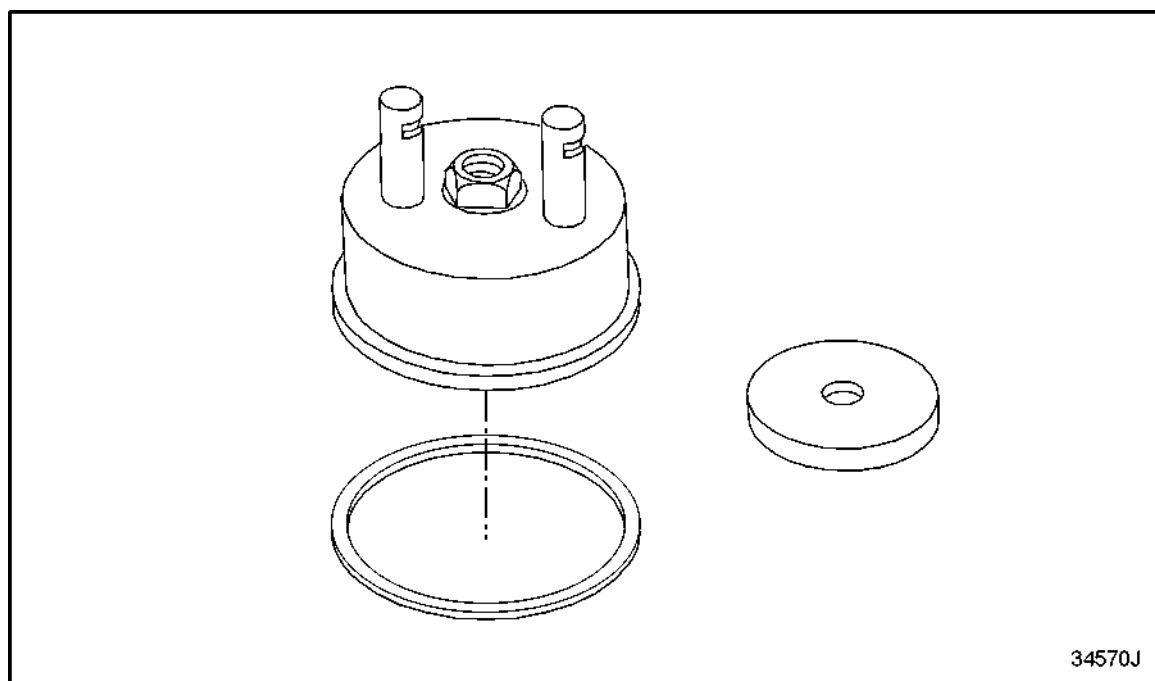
Front/Rear Seal/Wear Sleeve Install ,J 35686-A
